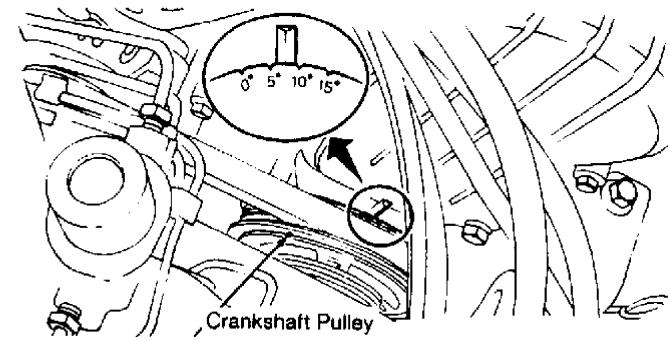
Locating Ignition Timing Mark - 3-Cylinder Courtesy of Subaru of America, Inc.
